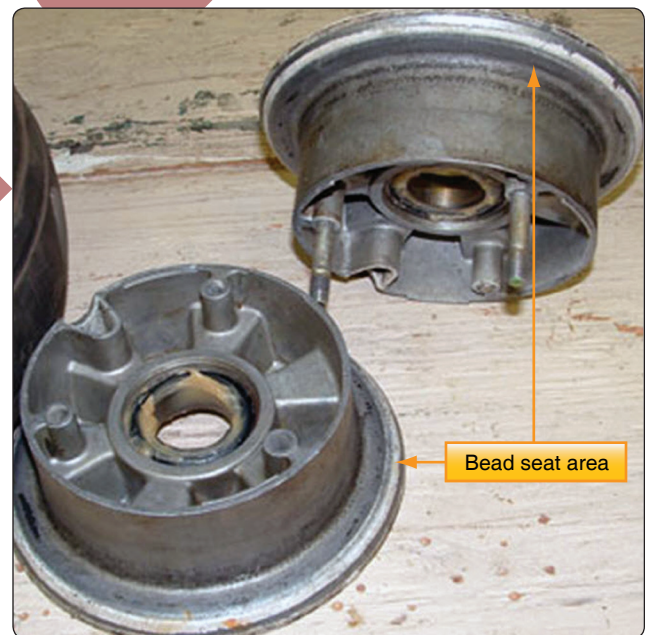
The bead seat areas of a light aircraft wheel set. Eddy current testing for cracks in the bead seat area is common.
